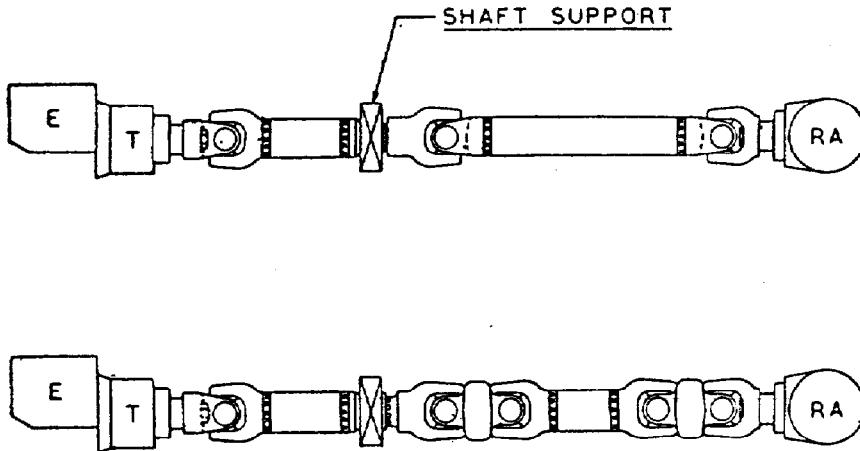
TWO-JOINT OUTBOARD SLIP DRIVESHAFT ( PASSENGER CAR OR LIGHT TRUCK TYPE )
